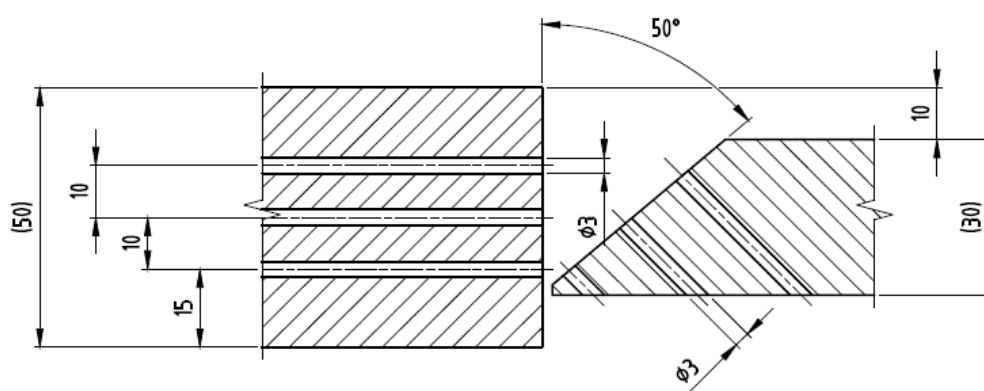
Cross section of the locations of holes for thermocouple placement for full penetration butt weld (dimensions are in millimetres).
